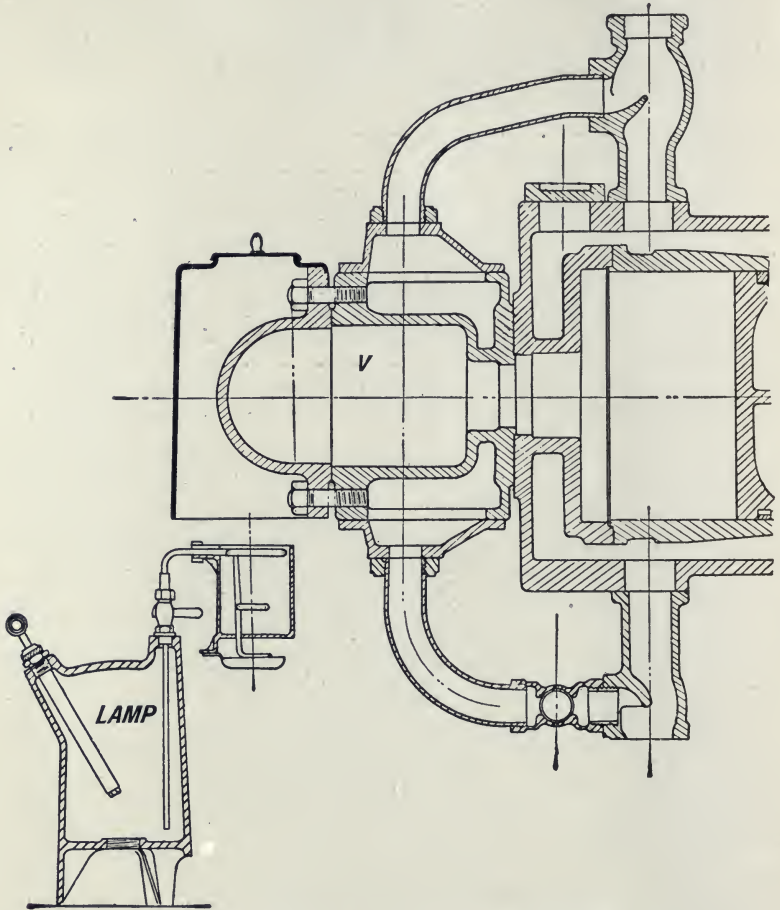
HORNSBY OIL ENGINE VAPORIZER.
